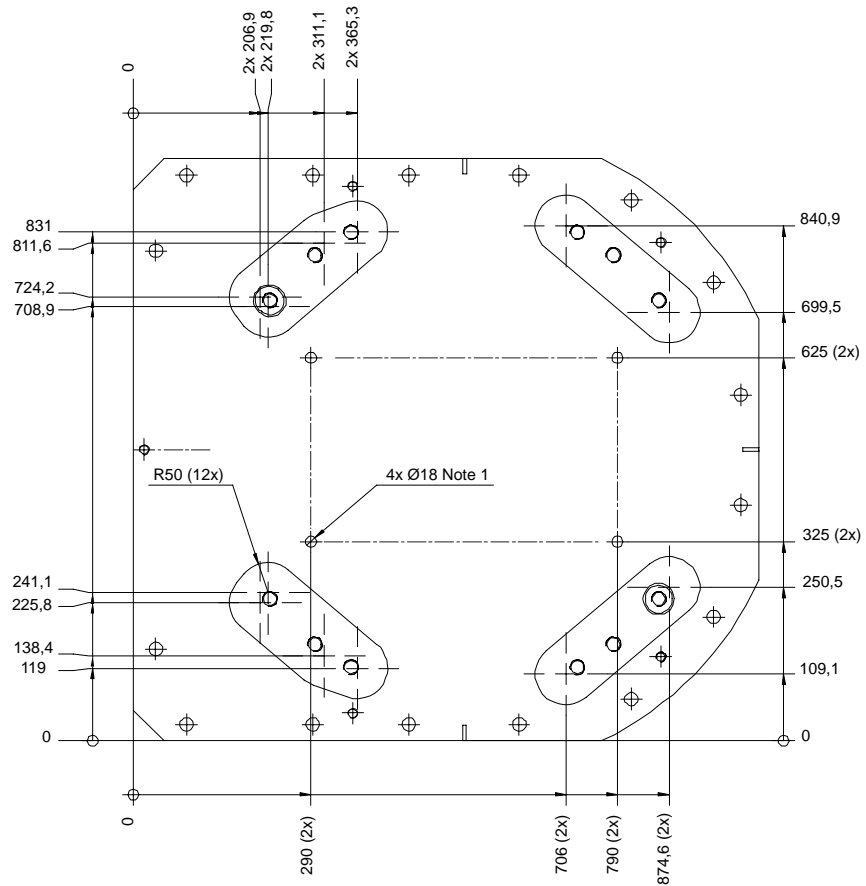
Base plate dimension print, measurements of the adaption for the robot base (dimension in mm).
